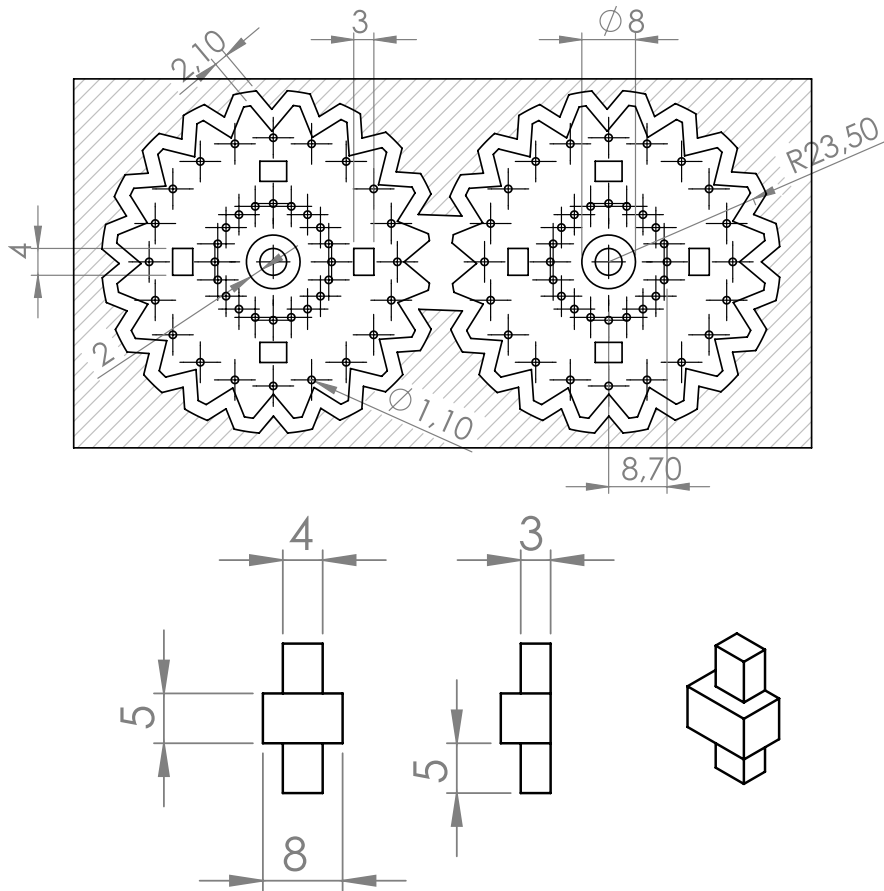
Technical drawing of the PTFE plates and spacers for the cyclotron resonator, also made with the milling machine. Dimensions in mm.
